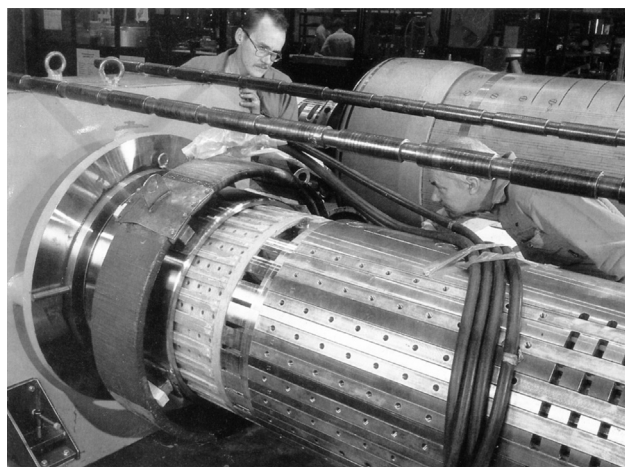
Rotor winding. (Source: Alstom Power.)
